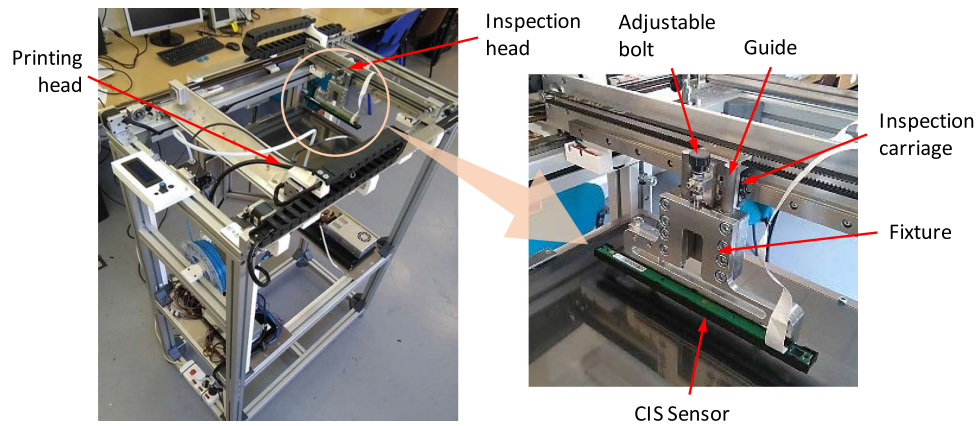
Test bench and CIS sensor carriage adapter mounted on the inspection carriage.
